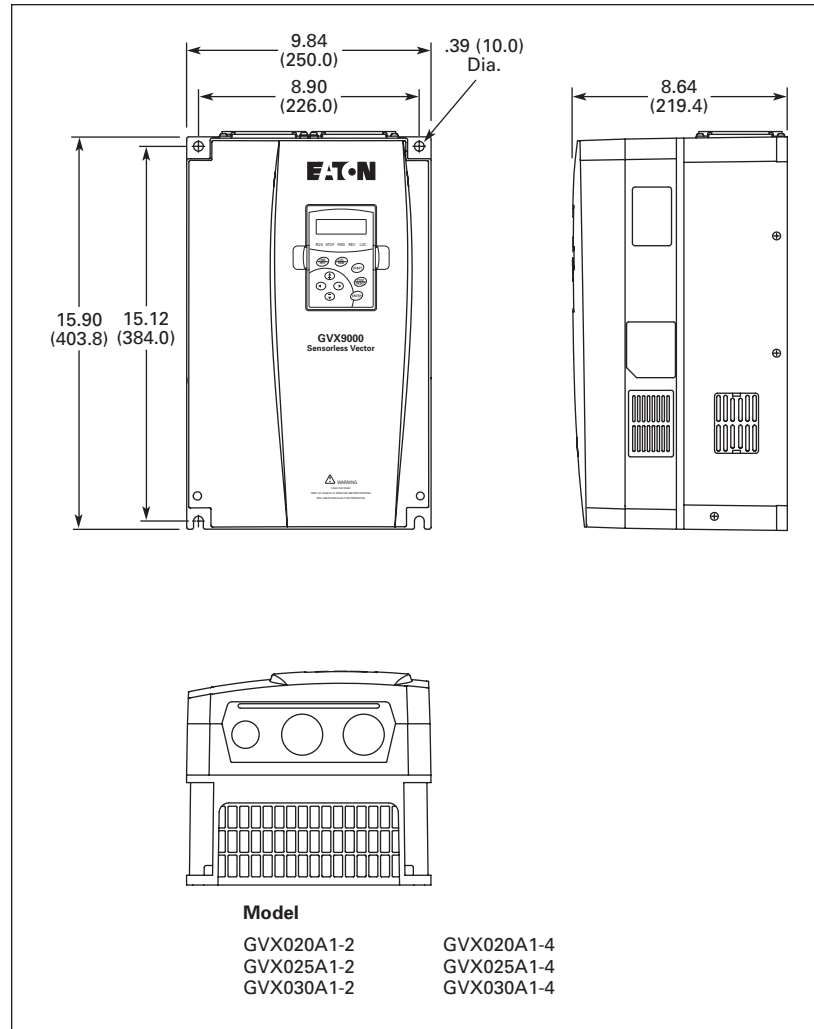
20 – 30 hp — Approximate Dimensions in Inches (mm)
